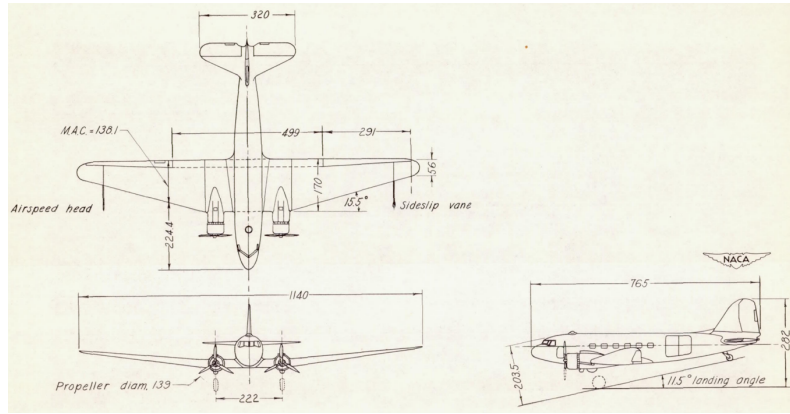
Three-view drawing of a Douglas DC-3. All dimensions in inches [10].
